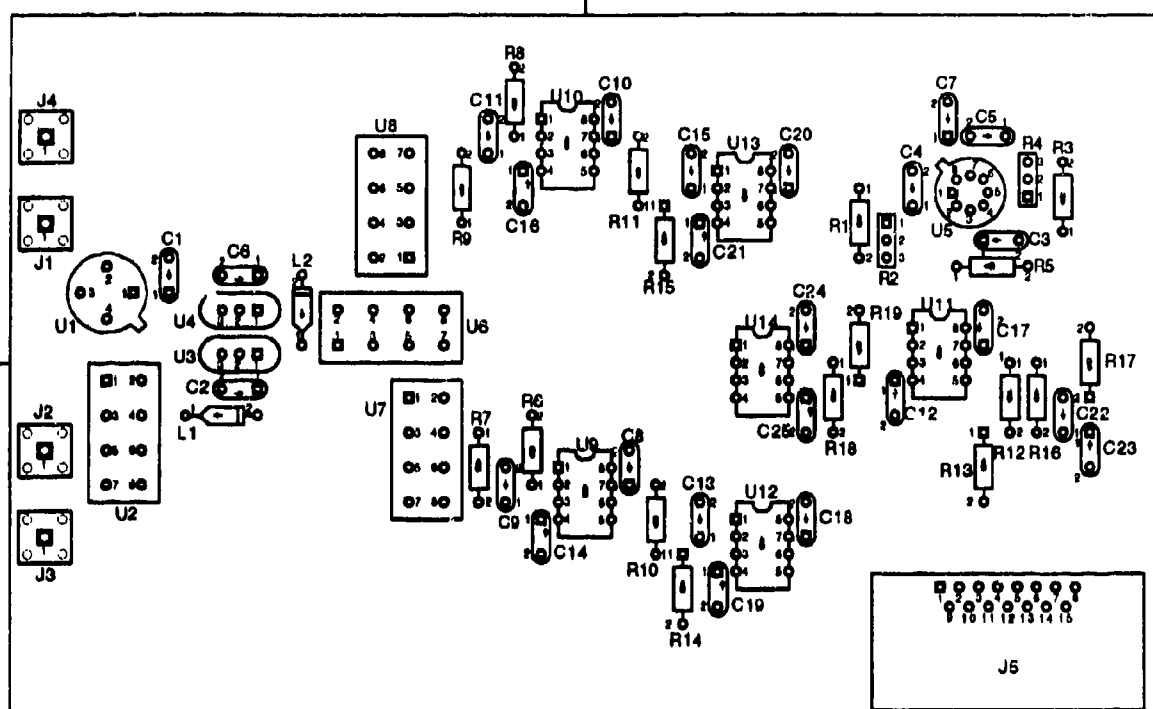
Layout diagram for Board 4 the Carrier Tracking Loop and Demodulator circuits.
